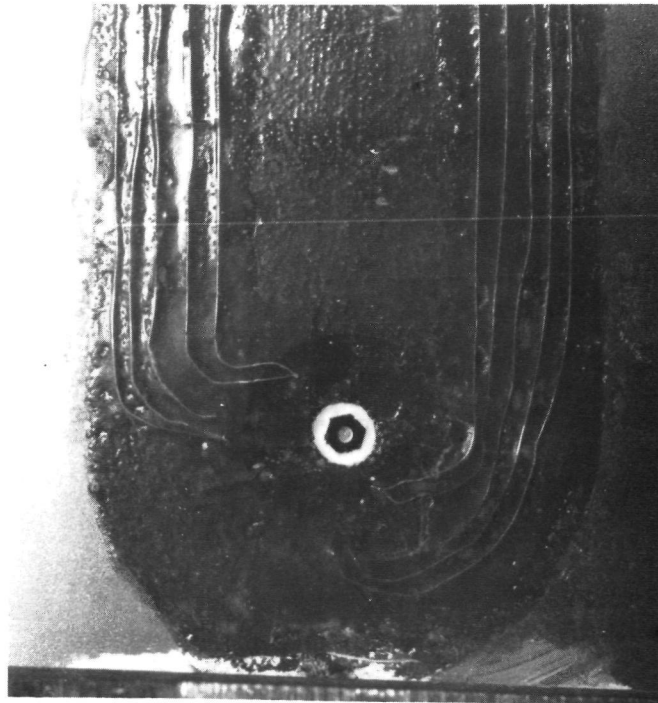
Titanium Test Specimen for Static Test with Transducer Mounting Configuration "E". View of transducer area on measured surface. (77-441-9559-A)
